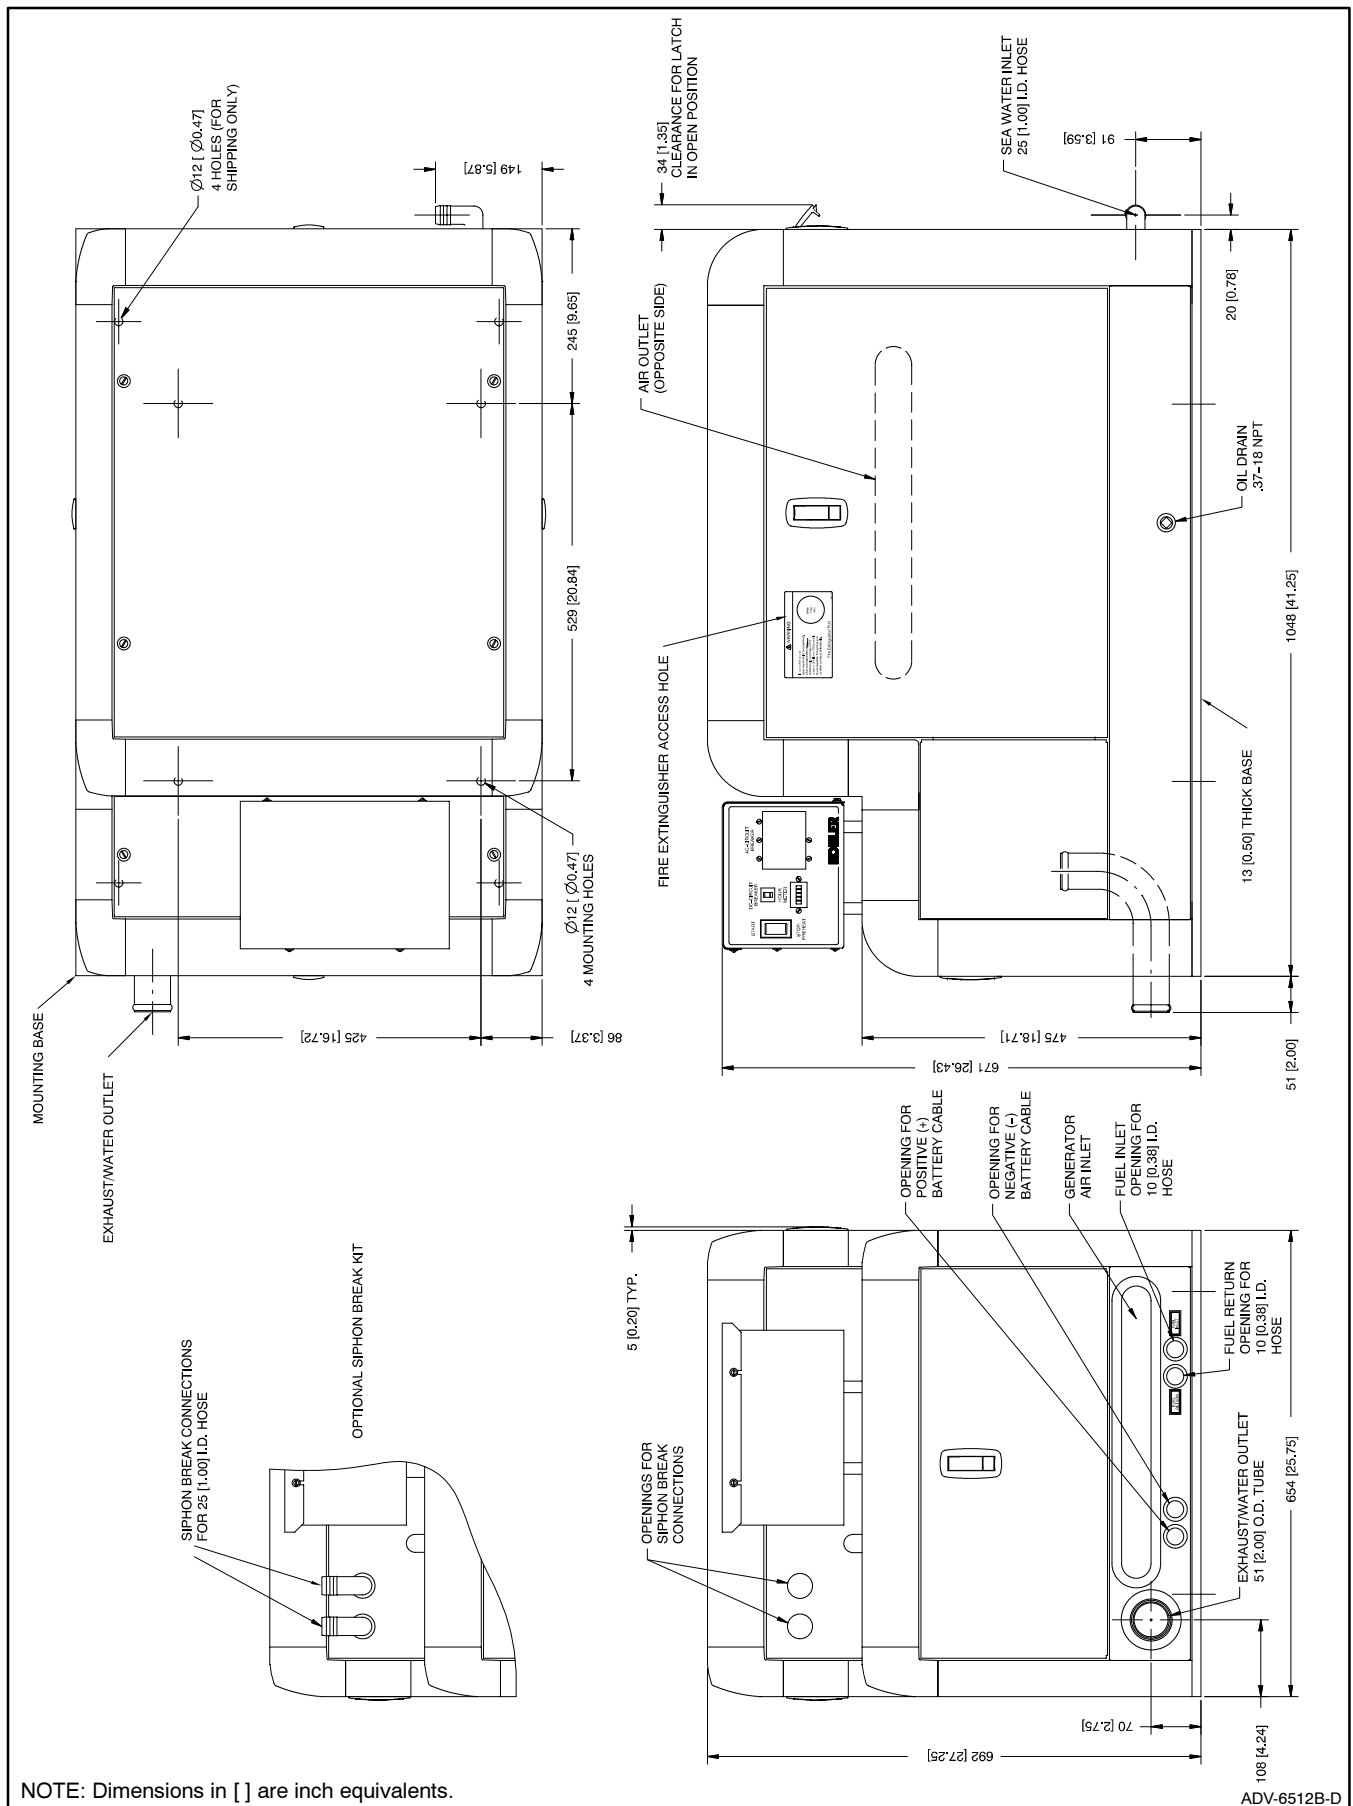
Dimension Drawing, 11EFOZ/13EOZ with Sound Shield
